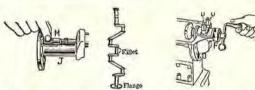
Measuring rear crankshaft main bearing journal (J) with an inside micrometer (M) to determine amount to face off each side of rear main bearing. Fig. 22A (center). Crankshaft to shoulders. The fillet is the rounded corner on crankshaft journals next to shoulders. The ends of bearings must be rounded off or filleted otherwise the ends of bearings would bind. Fig. 23. Facing of main bearings with facing tool (F). Time is saved in removing and installing the bearing caps throughout the different operations, if quick detachable bolts (U) are used (provided with equipment).
